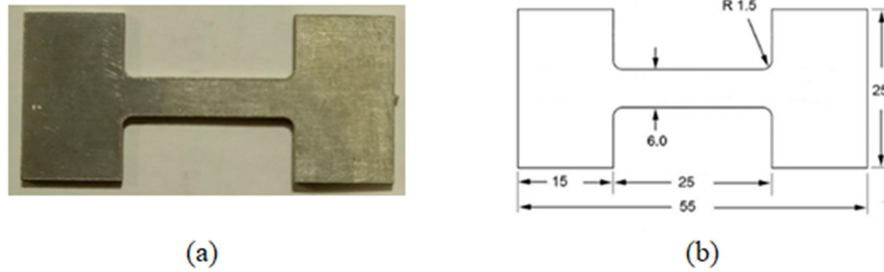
Uniaxial tensile test sample; (a) photograph of the test sample and (d) sample drawing with dimensions (Comley, 2007) (all sample dimensions are in mm).
